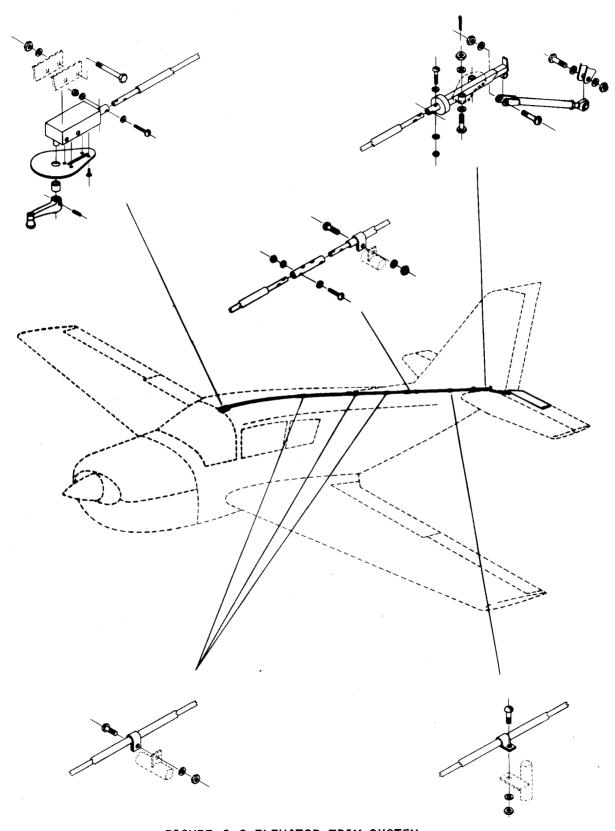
ELEVATOR TRIM SYSTEM
